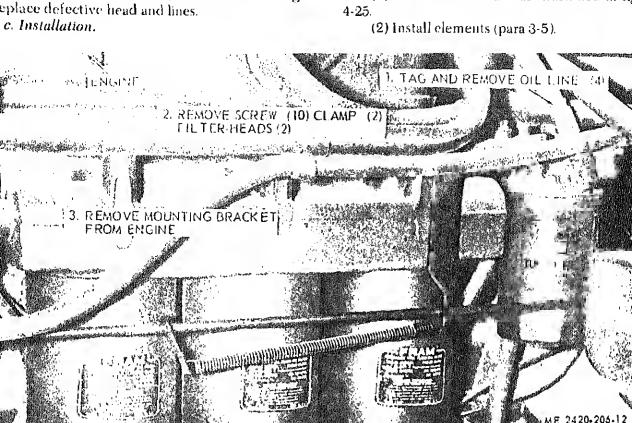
Engine and turbocharger filter head, removal and installation.
